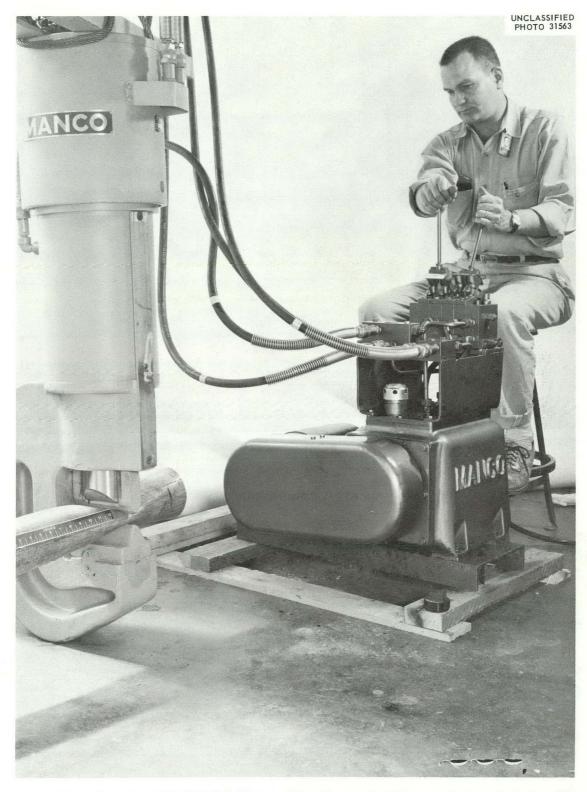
The MC-125-DA Hydraulic Shear Cutting a 4-in. Sched.-40 Stainless Steel Pipe.
